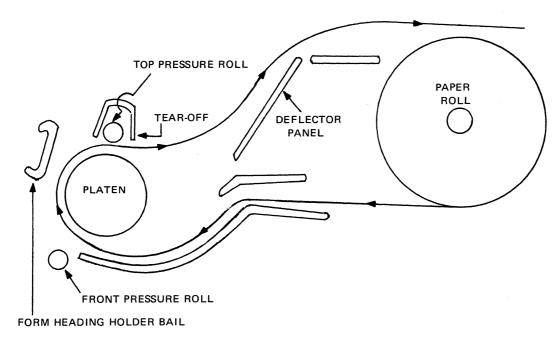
Journal Path, Rear Feed Forms Handler
